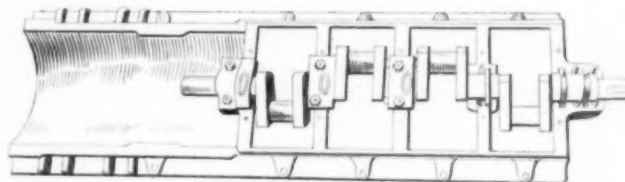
ARRANGEMENT OF CRANKSHAFT BEARINGS AND BASE COMPARTMENTS
